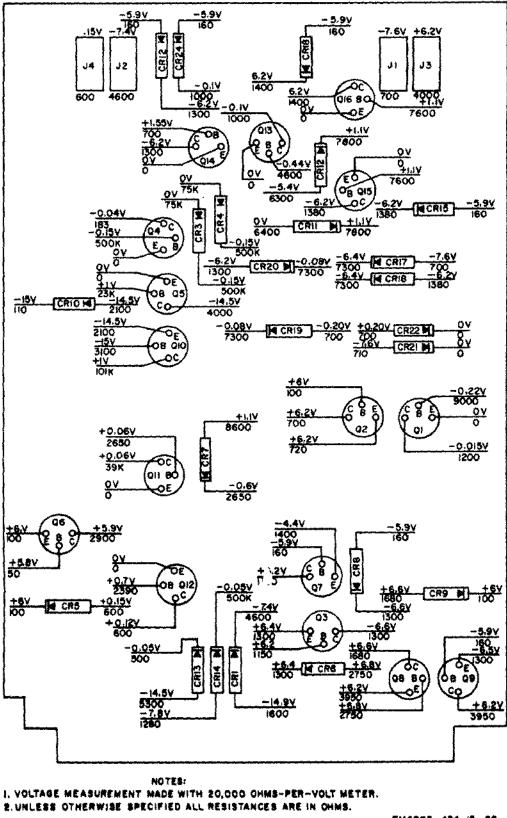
PC card assembly A9 (PC 80034050 ) voltage and resistance diagram.
